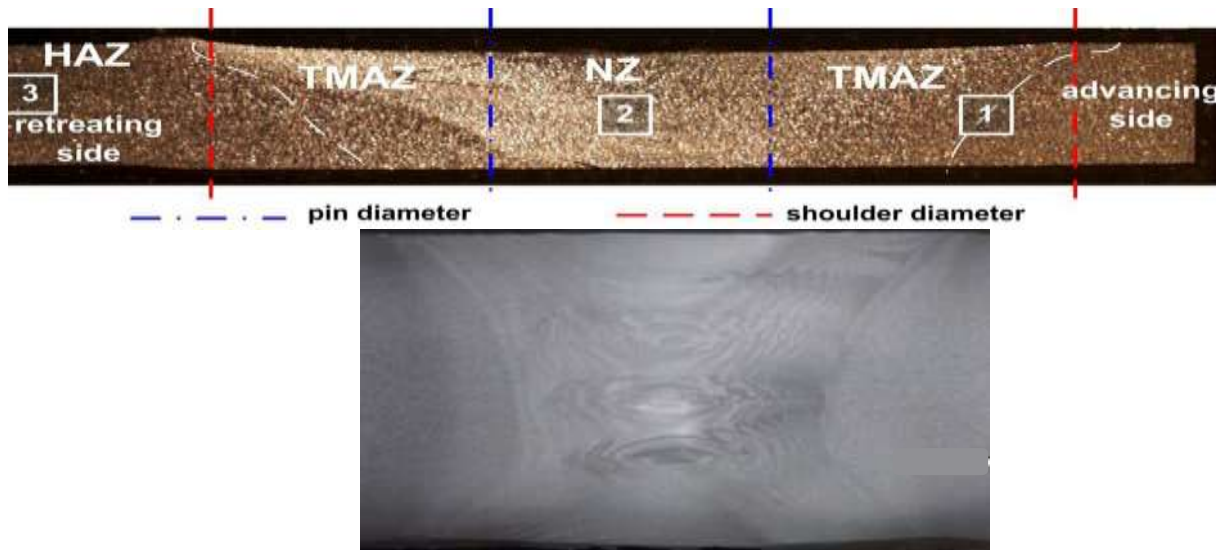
Macrostructure from Bobbin Tool Welds at 550 rpm and 90mm/min
